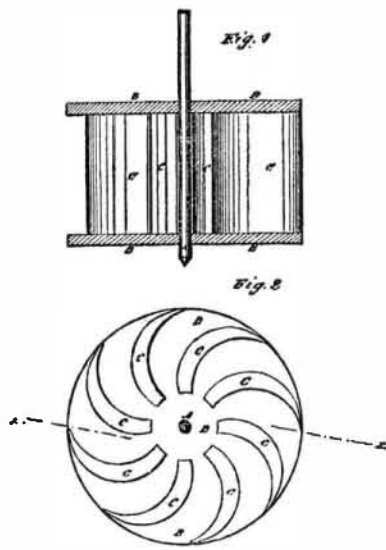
shows a cross section of the wheel, taken through the line, *xx*, in Fig. 2. Fig. 2 is a top view, with the cover removed. A represents the shaft to which the wheel is attached, the lower end of which is designed to revolve in a step in a simple frame secured in the bed of the stream. The upper end of the shaft is designed to extend above high water mark, and with it is connected the gearing to give motion to the machinery to be driven. To the shaft, A, at suitable distance apart, are secured two disks, B, between which the buckets, C, are placed, and to which the upper and lower edges of said buckets are attached. The buckets are vertical, are thicker at their inner ends, taper to an edge at their outer ends, and are curved, as shown in Fig. 2. The inner ends of the buckets, C, do not extend quite to the center of the shaft, so as to leave a clear space around the shaft, A. With this construction, the water will enter at one side of the wheel, and escape at the other side, giving it an impulse both times, and will rotate the said wheel in the same direction, in whatever direction it may be flowing.
